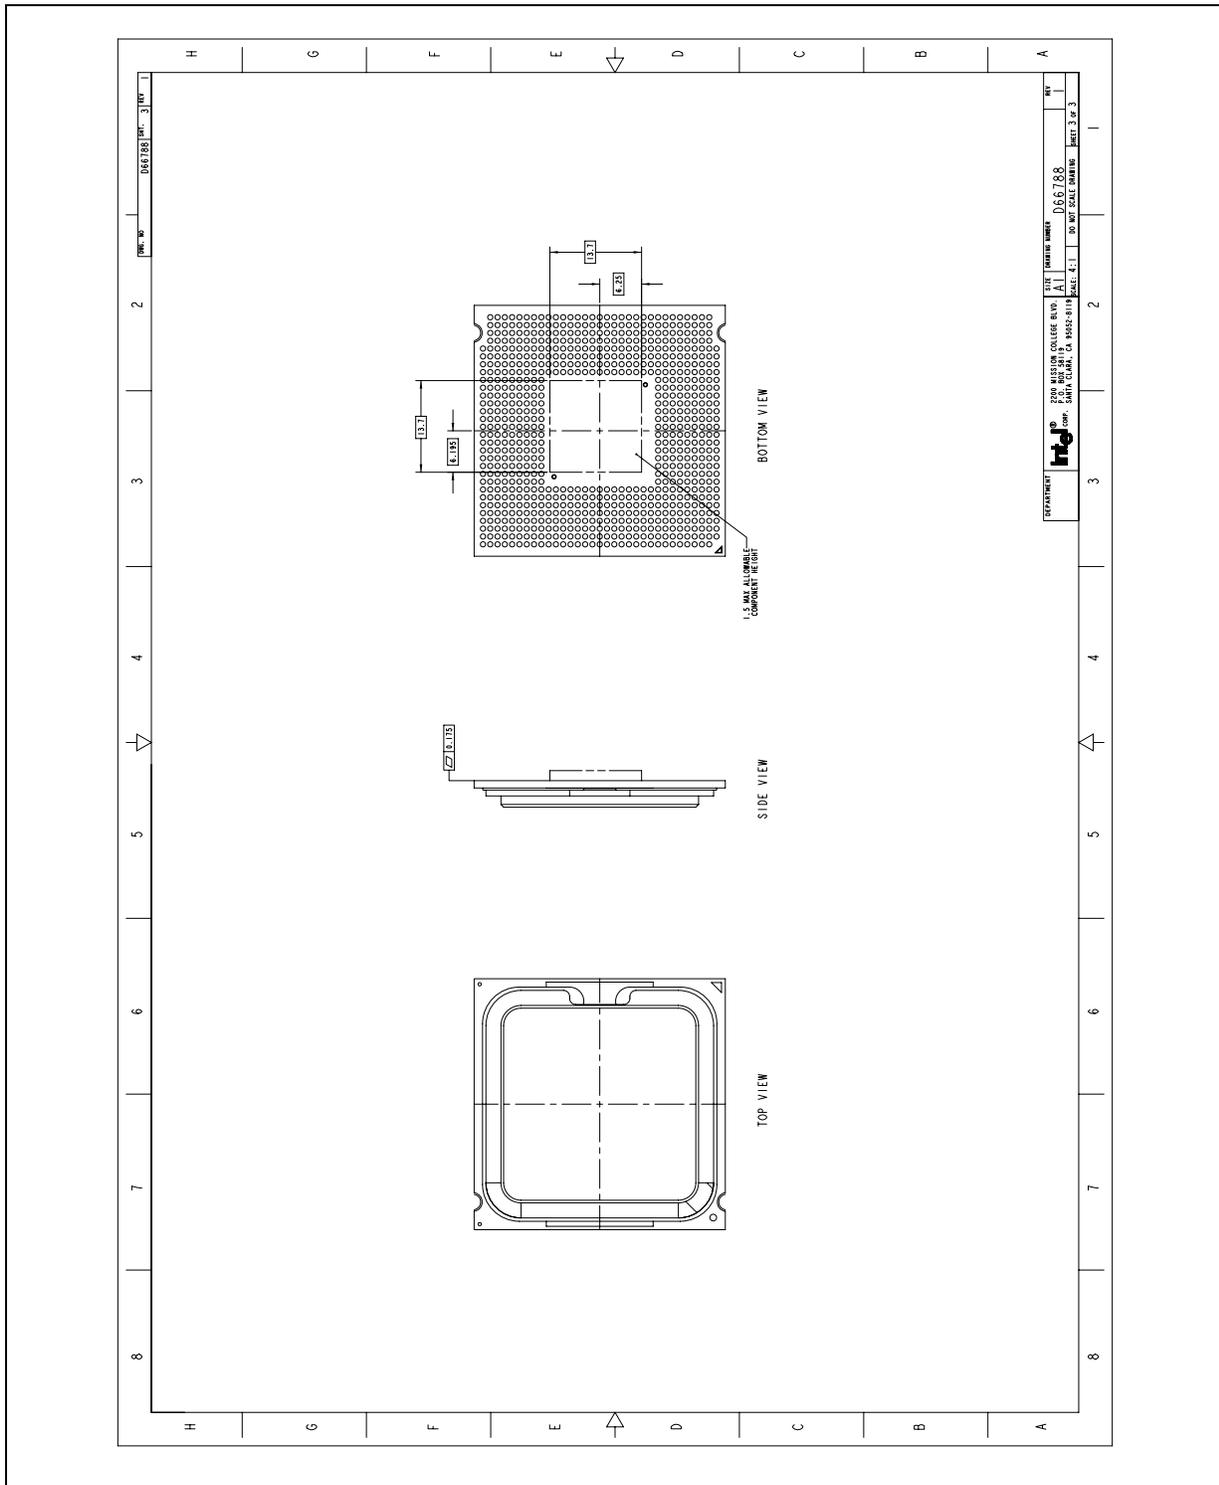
Processor Package Drawing (Sheet 3 of 3)
